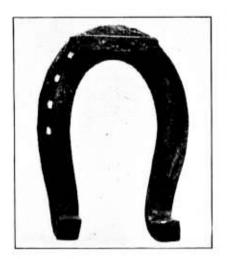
Ready-to-wear mule shoe, with toe and heel calks
